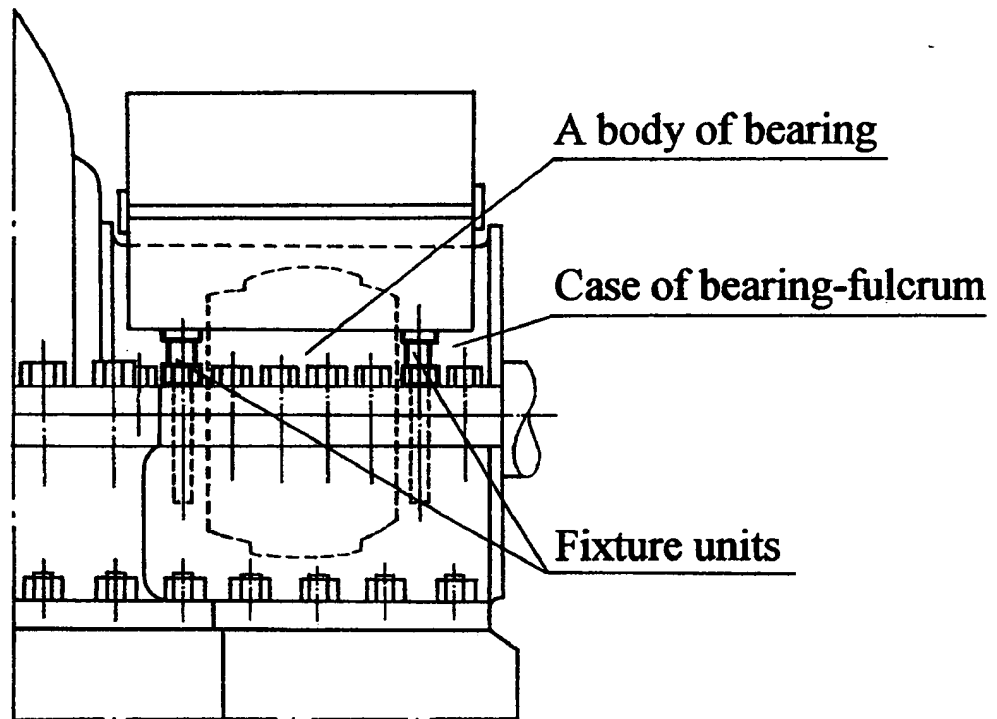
Preferable setting of fixture units of the B-F-L-Ws.
